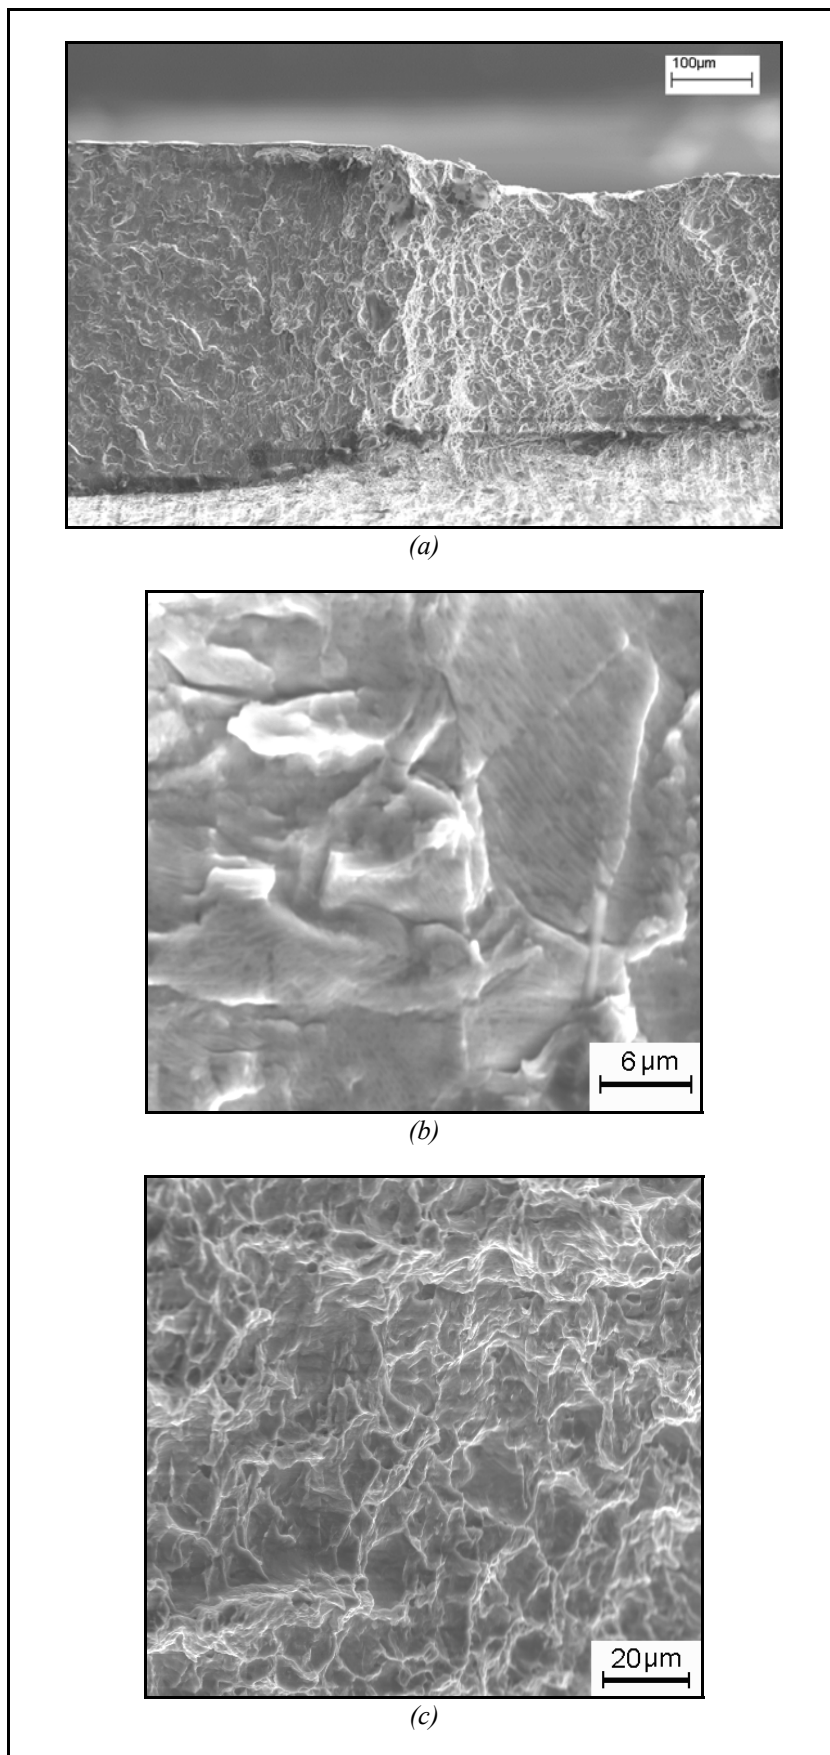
Typical fatigue fracture: (a) general view (SR); (b) crack propagation (TD00); (c) final rupture (TD250-300)
